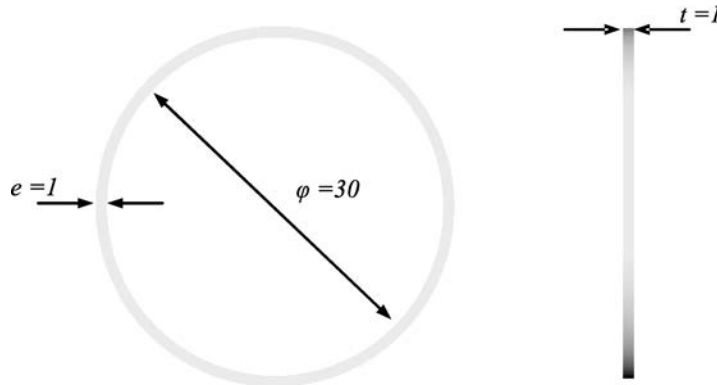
Geometry and dimensions (mm) of the specimen used in the simulations [28].
